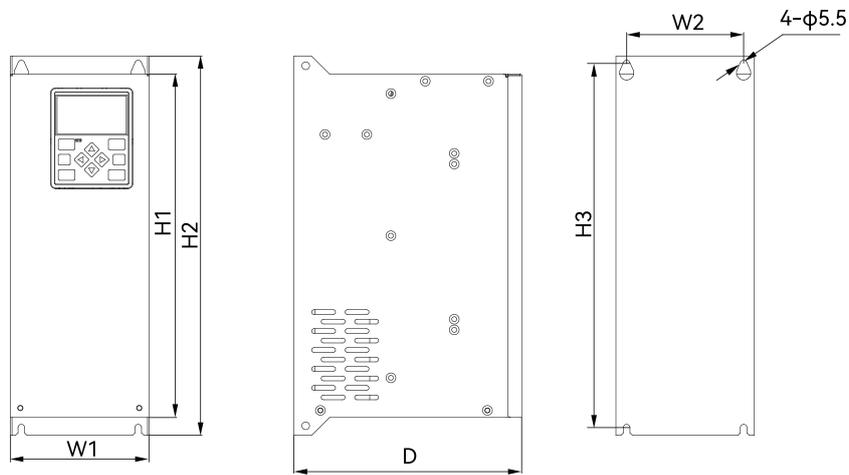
Dimensional drawing of E630 series products (11~15kW)
